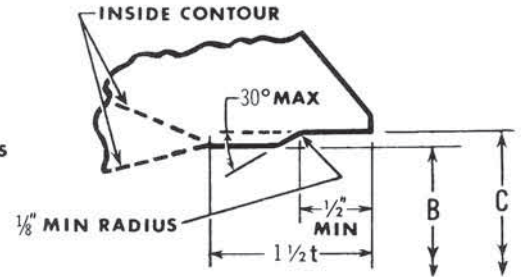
Welding End for Continuous Rectangular Backing Ring (inside contour).
